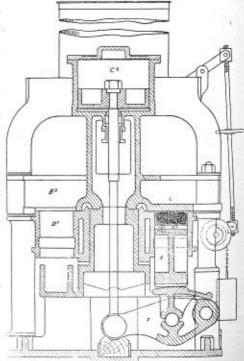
THE MANUFACTURE OF PATEST FUEL.
